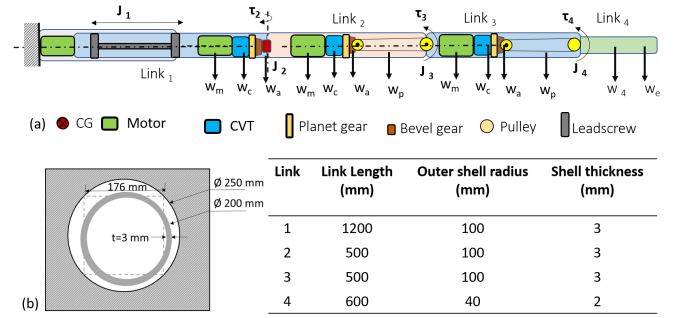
(a) Static loading condition at home position of the manipulator, (b) Geometrical details of each link.
